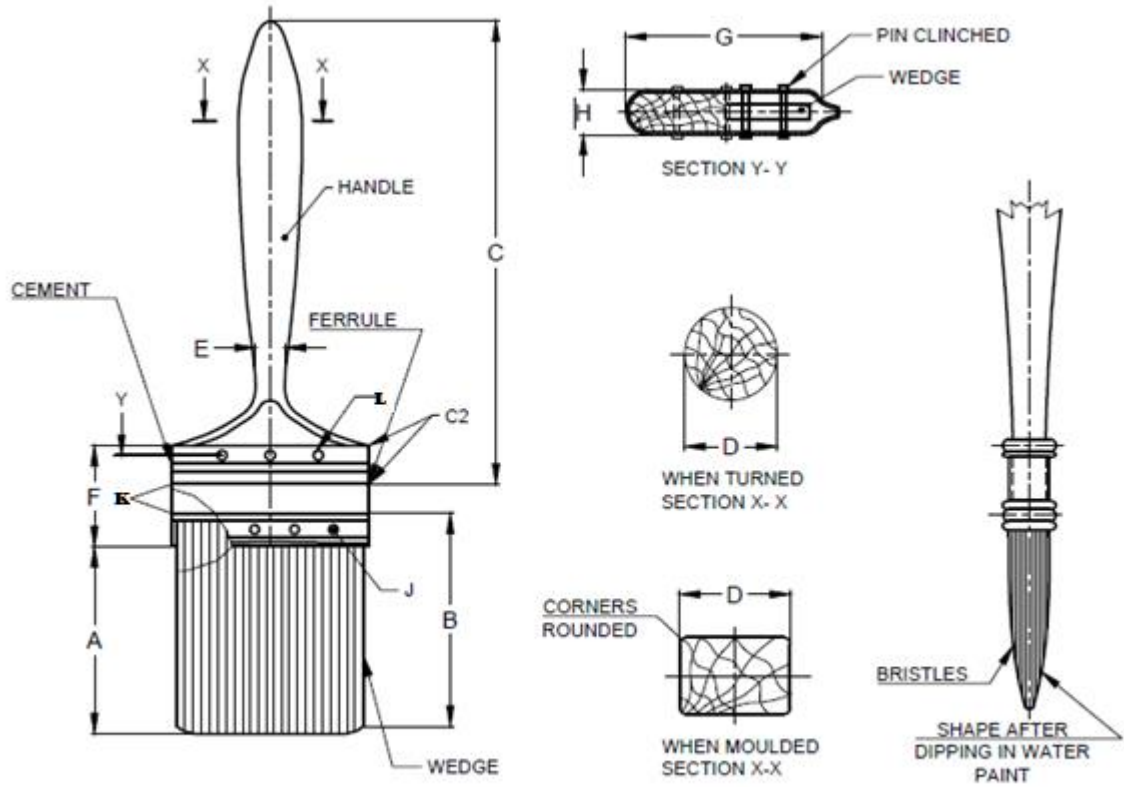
SHAPE AND DESIGN OF BRUSHES, PAINTS AND VARNISHES, FLAT
